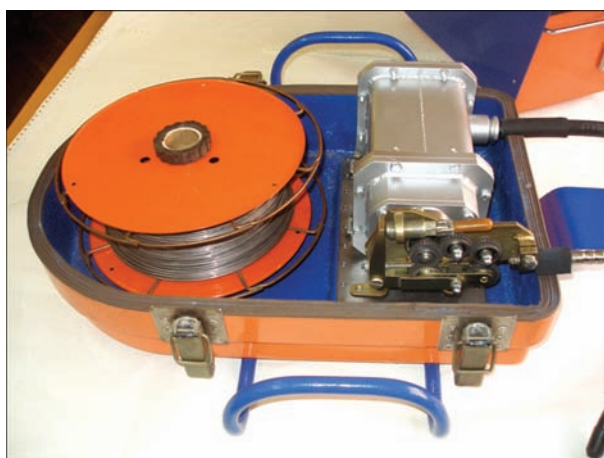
Semi-automatic machine for underwater welding and cutting by flux-cored wire at up to 200 m depth
